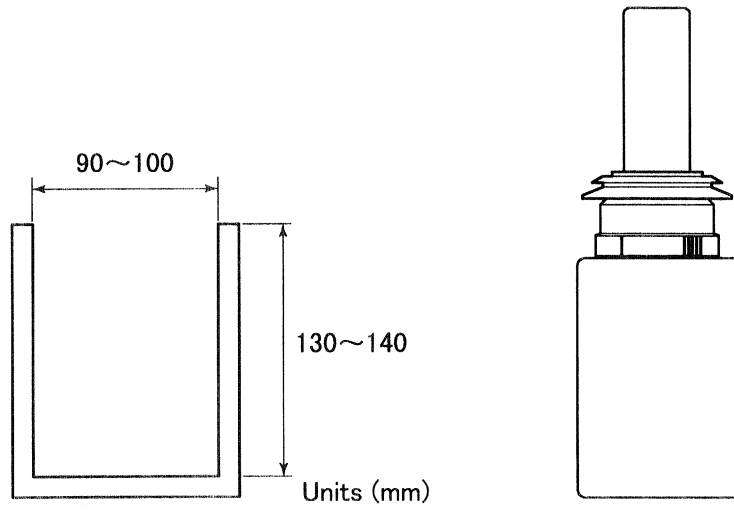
Dimensions of the Socket Holder and Installation Example
